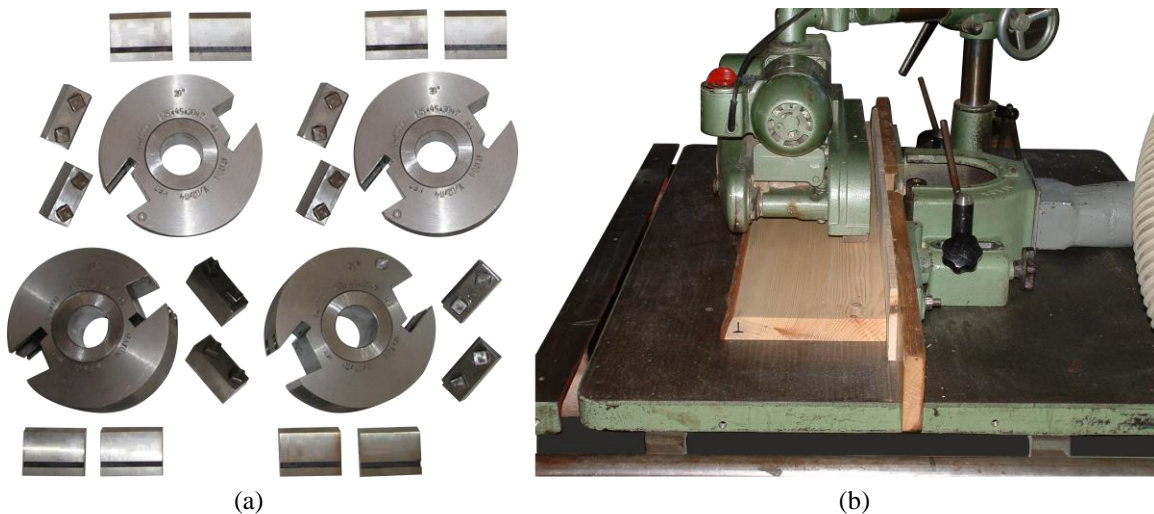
(a) Cutter heads and blades, (b) milling machine with feeding device
